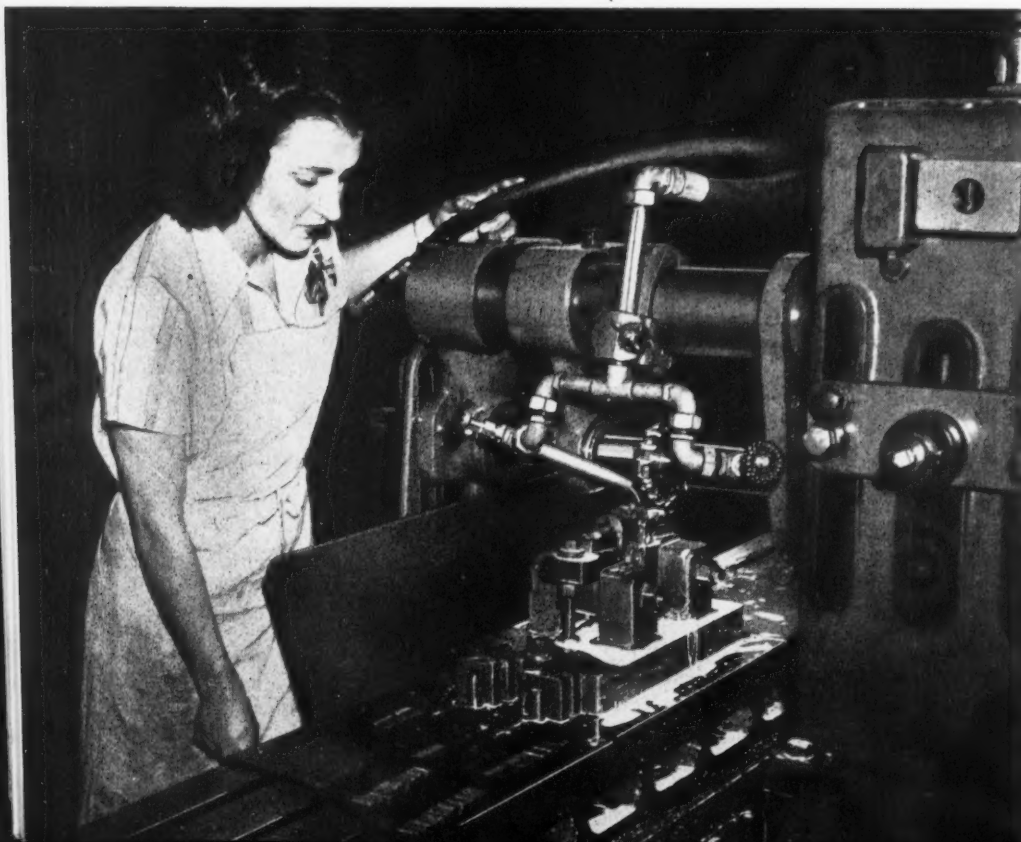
Milling Convex Form and Taper on Brazed Reaction Cylinder Blade. More and More Women are being Employed in This Turbine Plant for a Variety of Machining Operations
